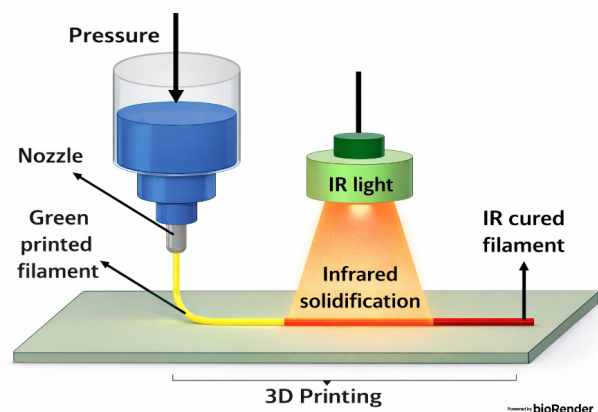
Method of fabrication of ceramic parts using IR curing CODE process.
